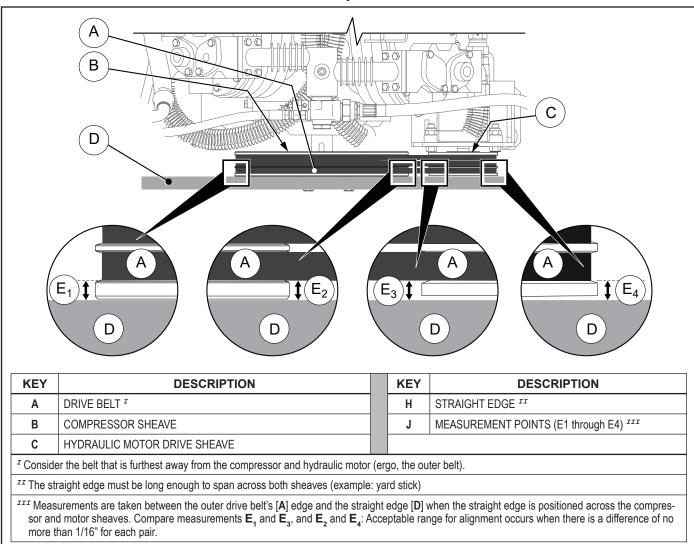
Drive Sheave (Pulley) Alignment Check
